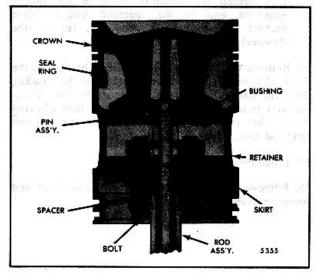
Cross-Head Piston and Connecting Rod Assembly
